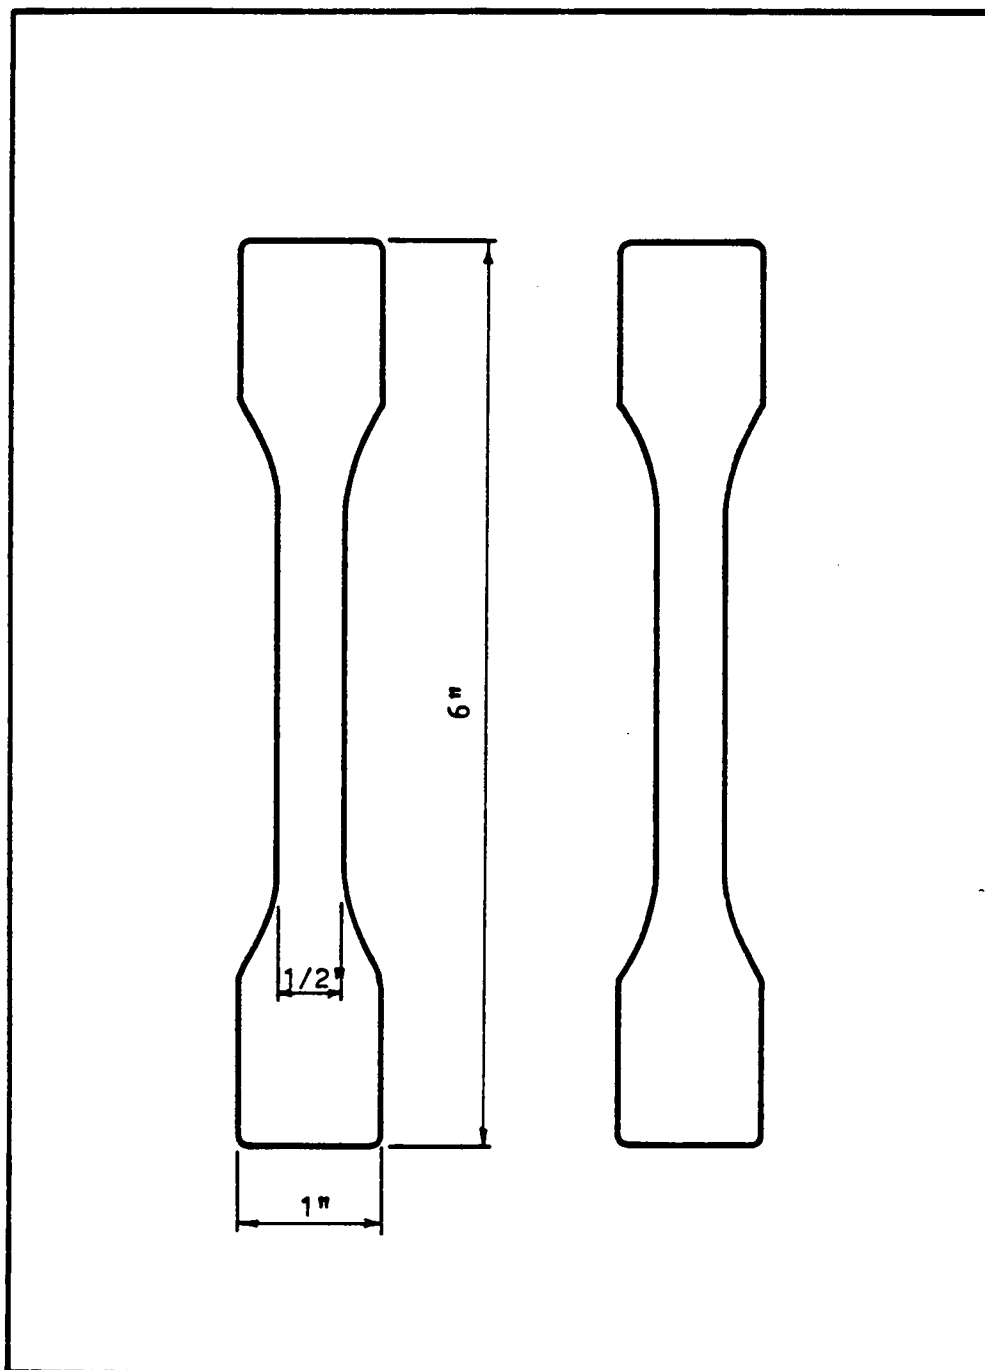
Illustration of the cavity plate for molding dumbbell samples.
